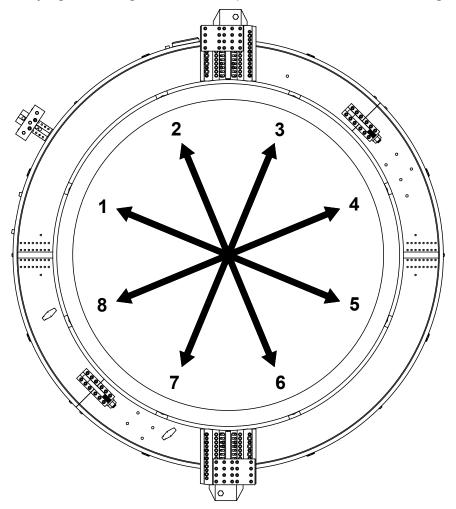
Square and Center Clamshell WD Clamshell Portable Lathe - Setup and Operation Manual
